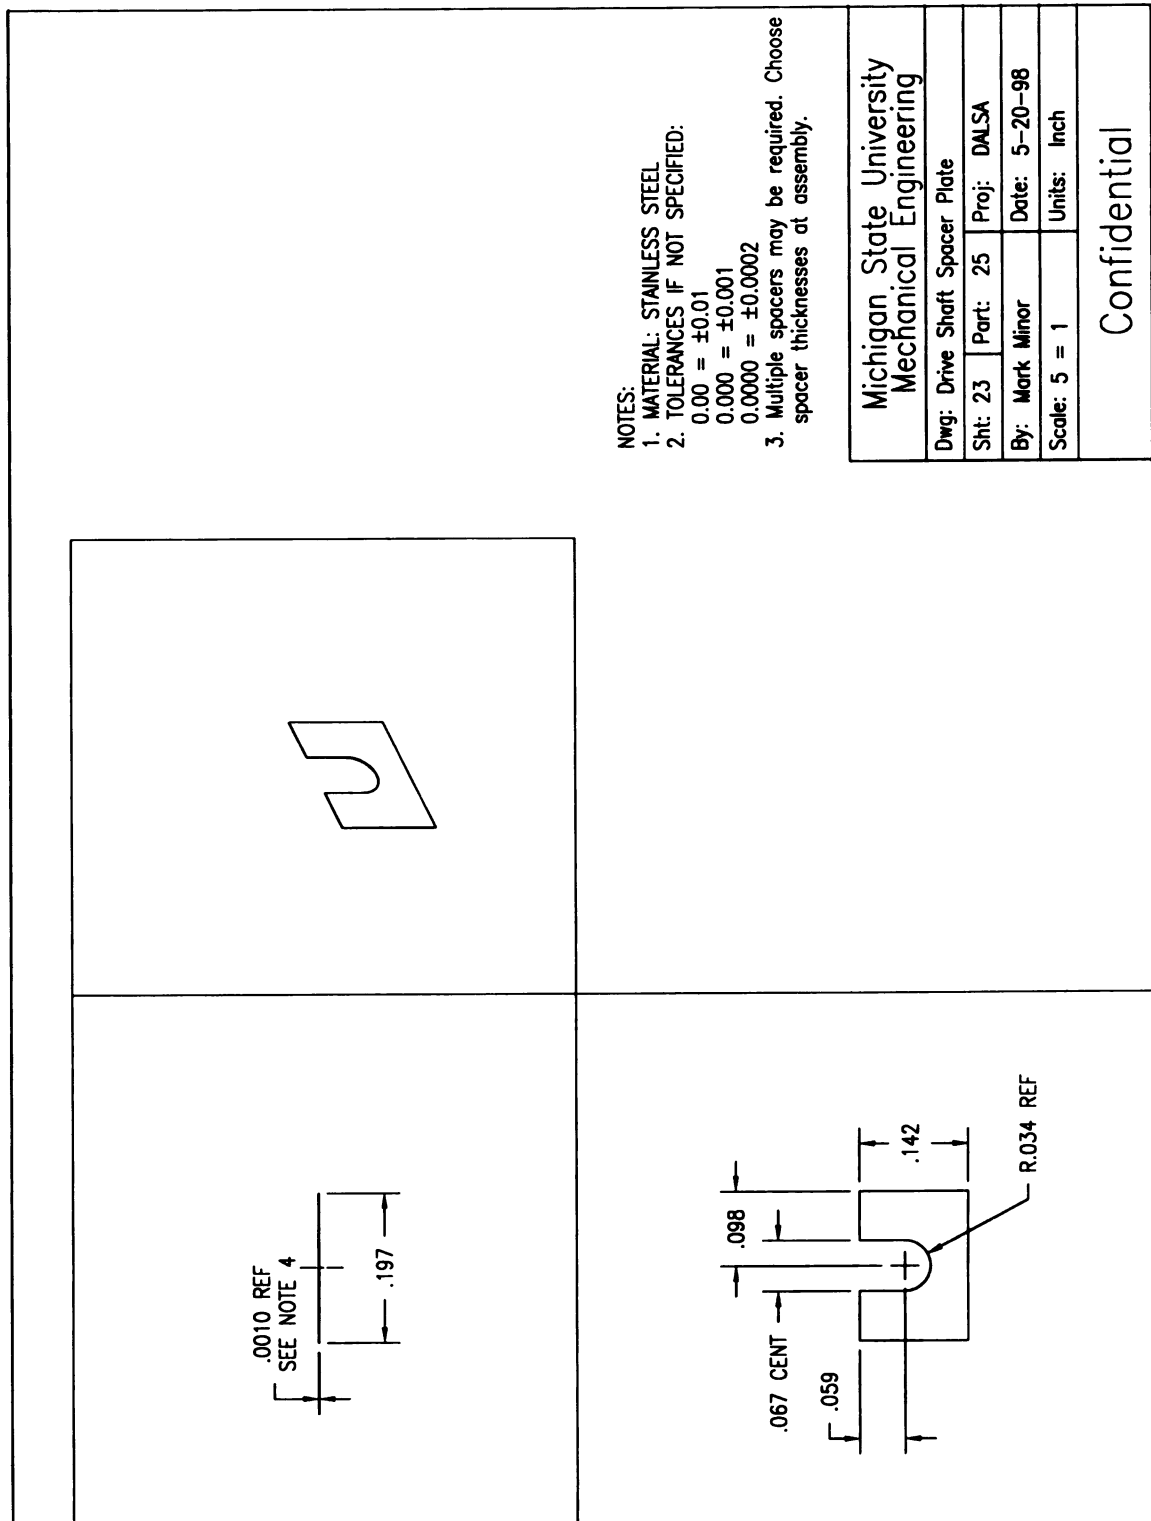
DALSA Component: Drive Shaft Spacer (sheet 23).
